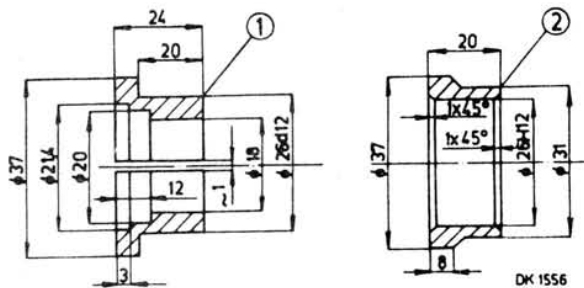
/3 - Secondary Piston Cup Mounting Fixture for dia. 22 mm Master Cylinder (1 - guide bush, 2 - clamping ring)
